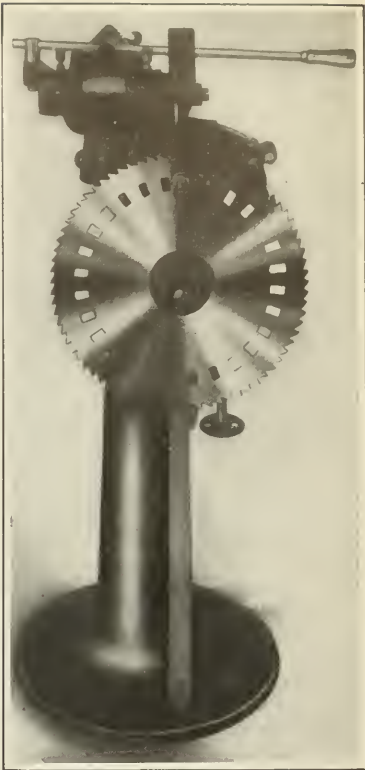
Hunter Grinding Machine for "Land" Type of Circular Saw Teeth
